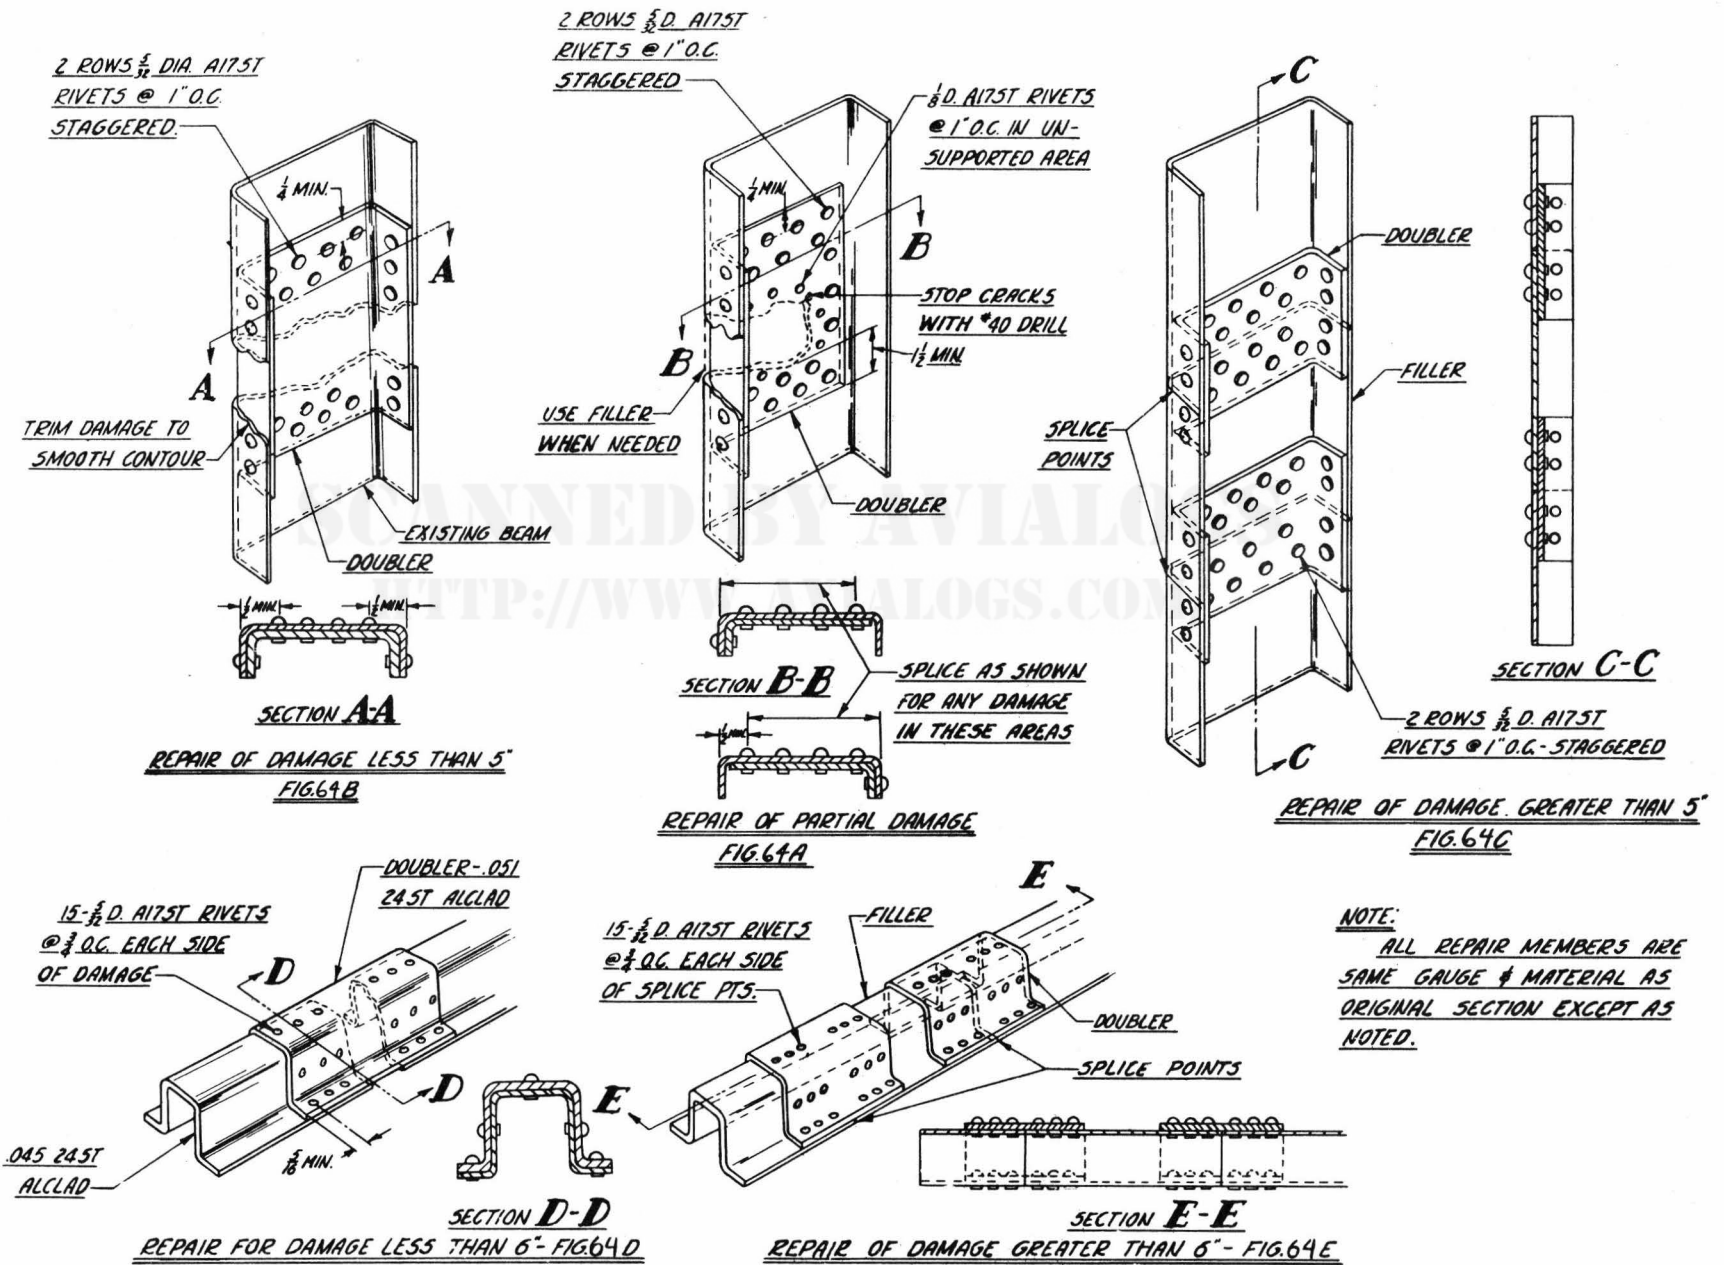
Empennage & Wing Flap Rib, Beam & Hat Section Repair
